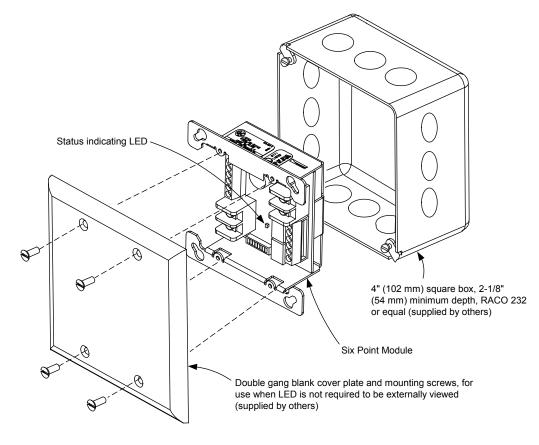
Mounting Reference, Double Gang Blank Cover Plate
